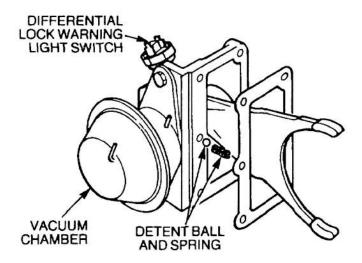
Removal of the Differential Lock Vacuum Chamber Assembly
